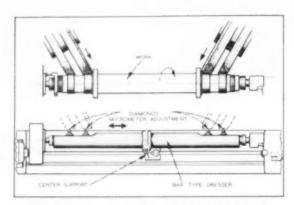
Diagram pictures relation of wheels and ground surfaces during plunge-cut grinding a tubular axle with two spaced wheels.
